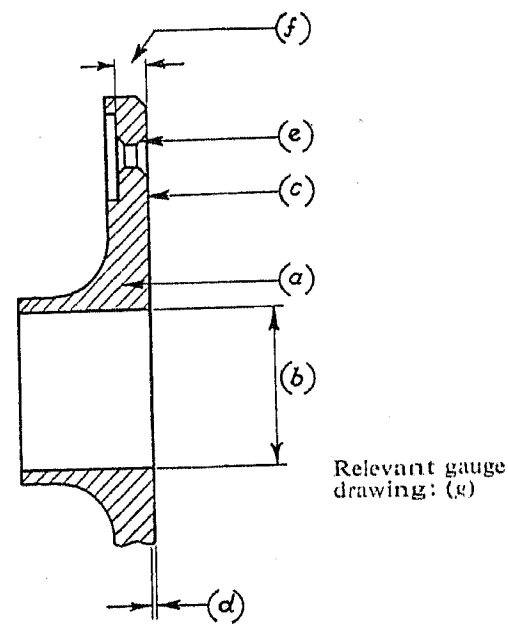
Typical parameters requested on the drawing of a waveguide part.
